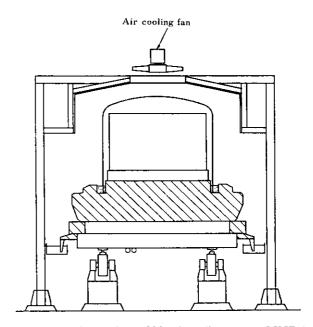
Sectional view of No. 4 cooling zone of KSR-1 furnace
